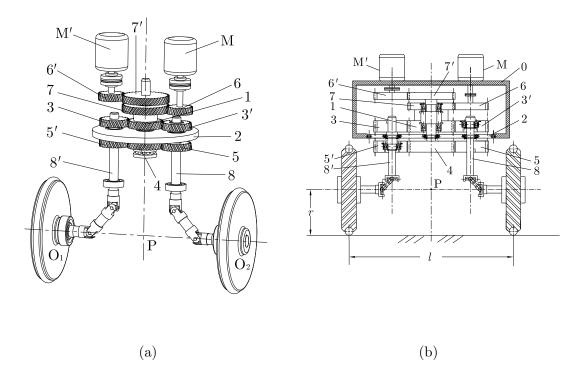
A layout of the DWT: (a) a perspective view; (b) a section view
